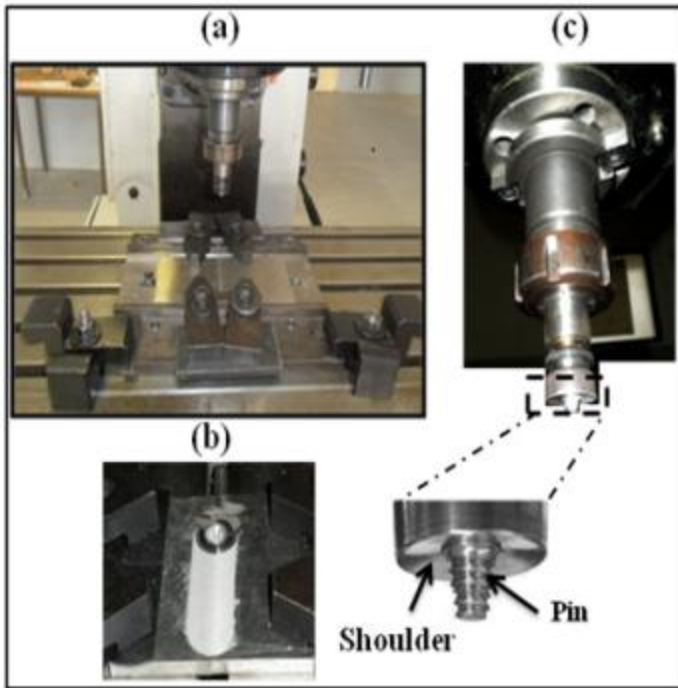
Friction stir welding machine (a) The clamping devices, (b) Butt welding configuration and (c) welding tool shape
